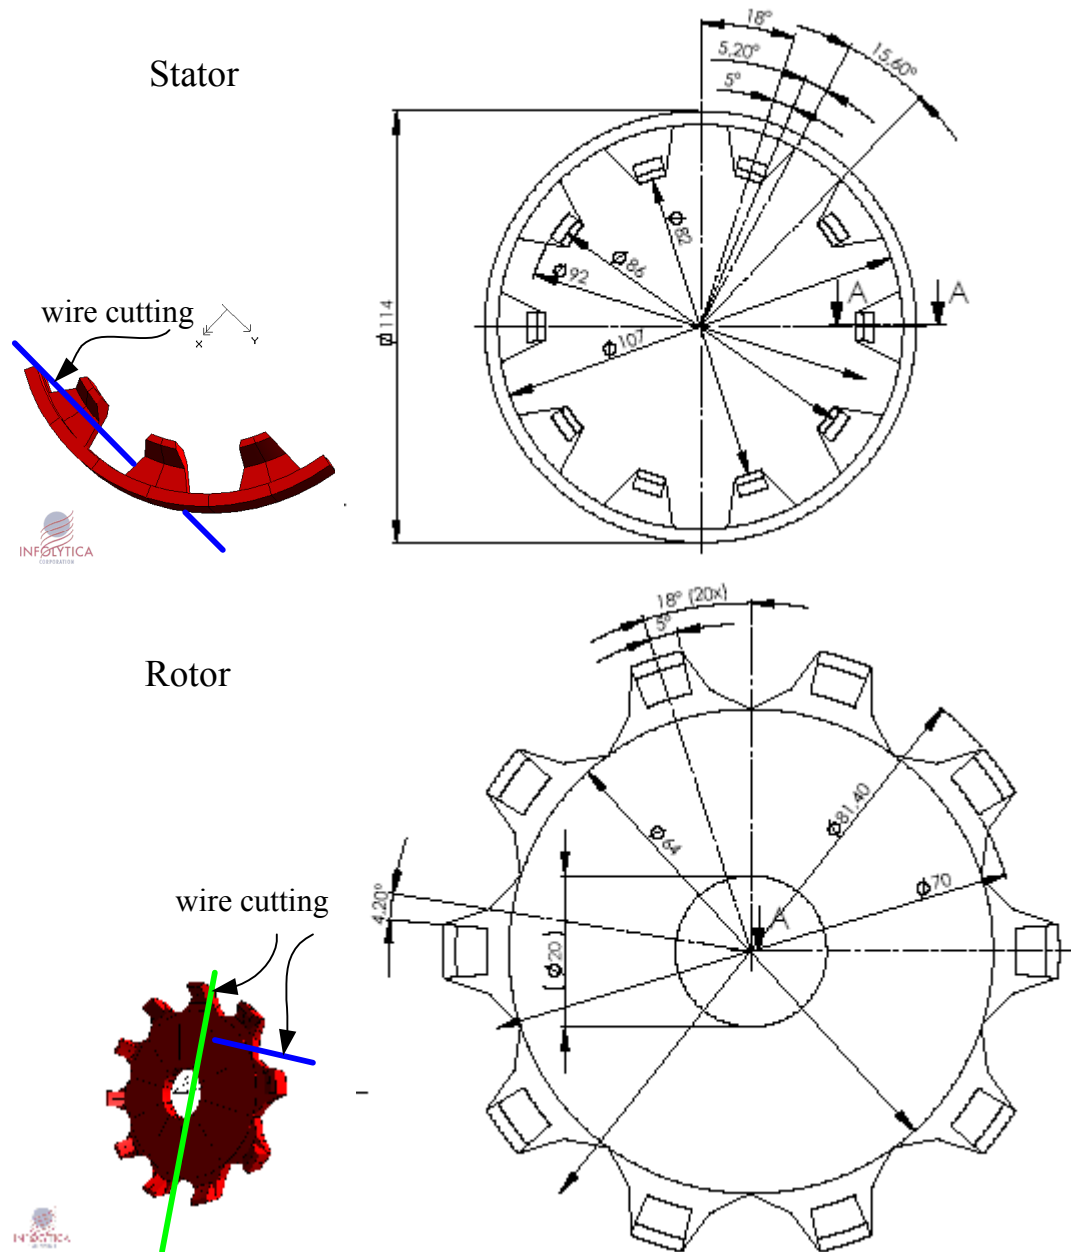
The wire-cut core parts and the cross sections of the parts.
